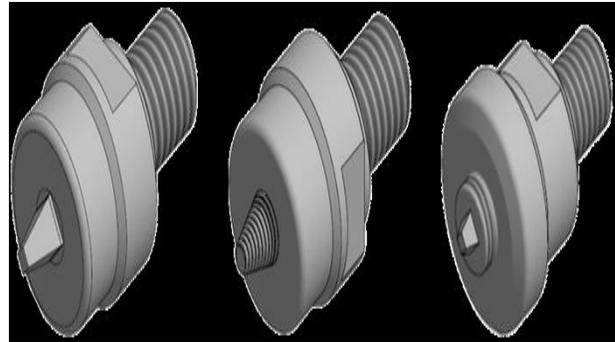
Tool geometries tested: a) Pyramidal pin; b) Tapered and threaded pin; c) Progressive pin ^[11]
